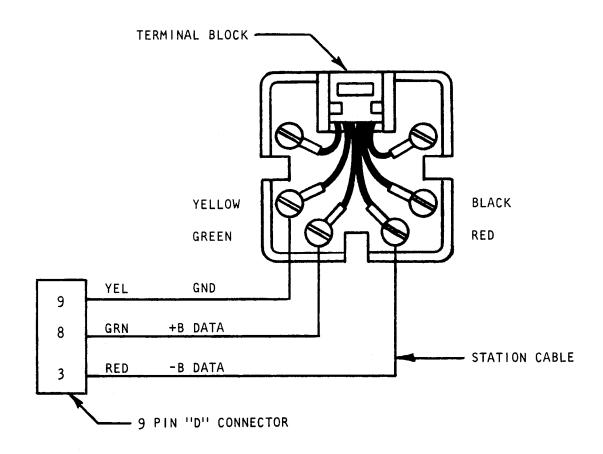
MODULAR CABLE ASSEMBLY, CA05XXX
